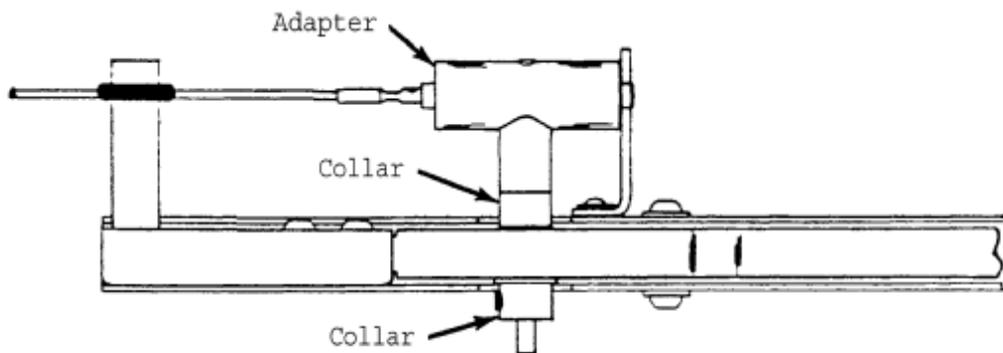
Adapter Installation on AD-1567 Holding Fixture
